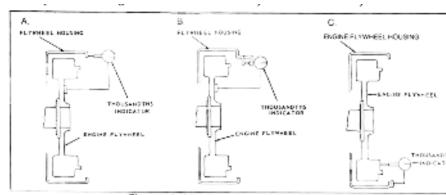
Dial Indicating Engine Flywheel and Flywheel Housin
